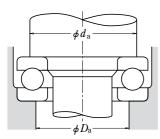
Face Supporting Diameters for Thrust Ball Bearings
